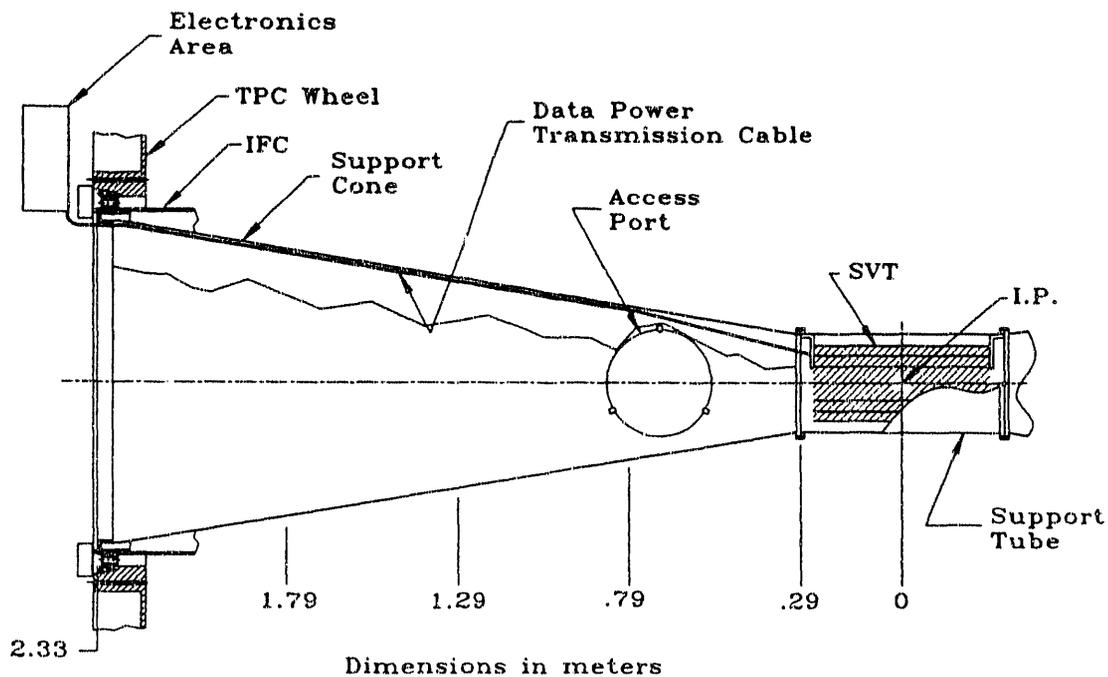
H-27 Elevation view of the assembled SVT mounted in the tube/cone support.
